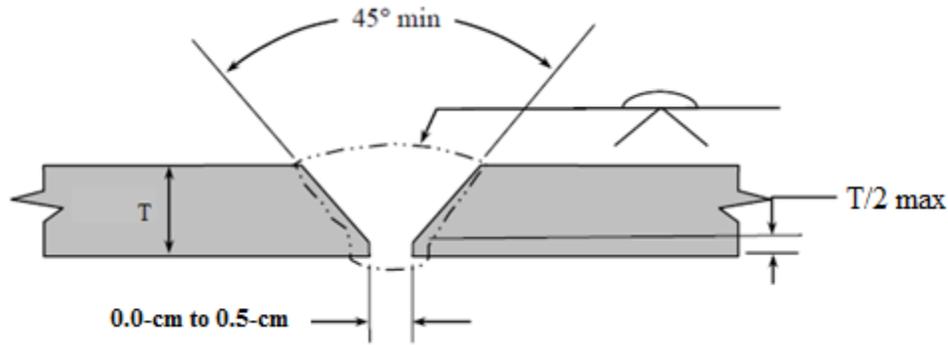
B2V.1 Joint: Single-V Butt Joint Welded Both Sides.
